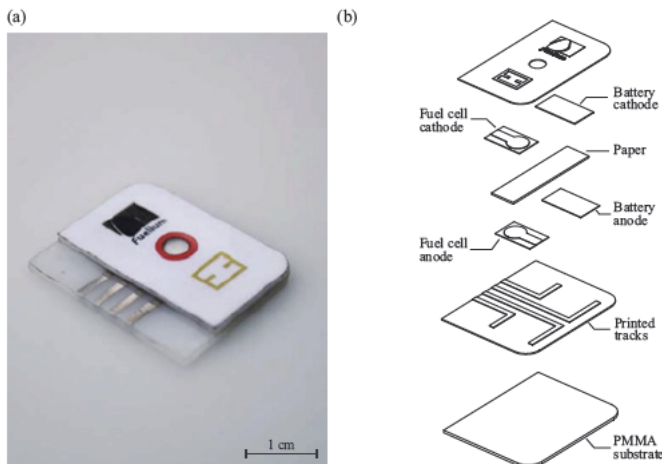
a) Picture of paper-based test strip. b) Exploded view of its main components.
